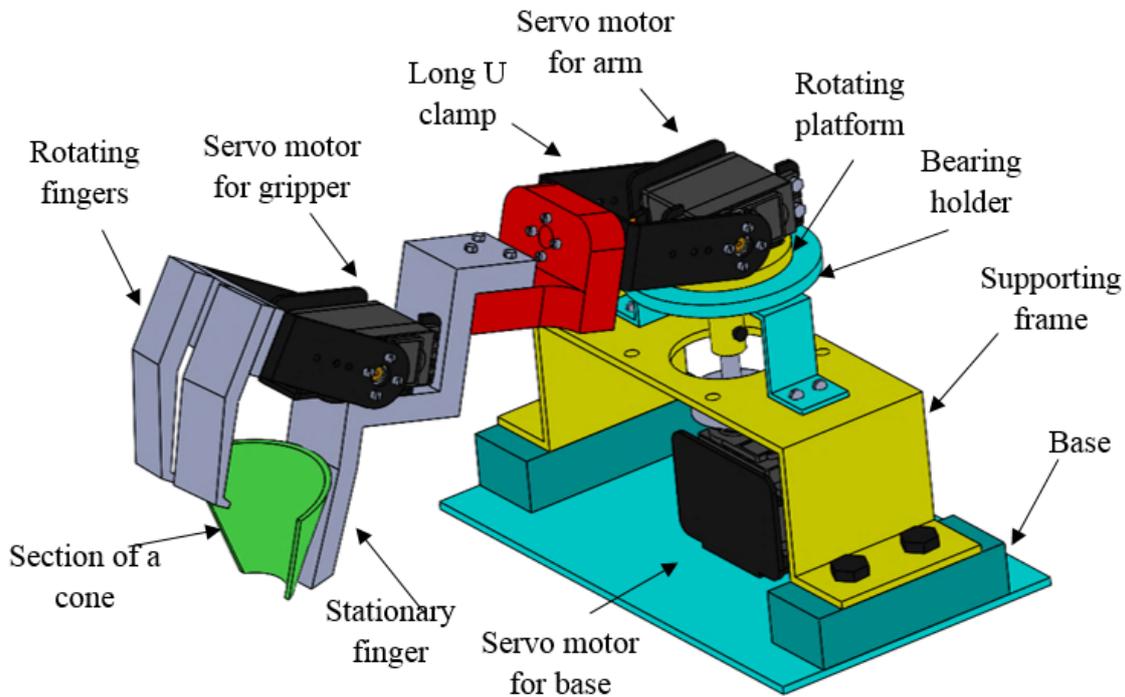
Isometric view diagram of the CAD model of the robotic arm
